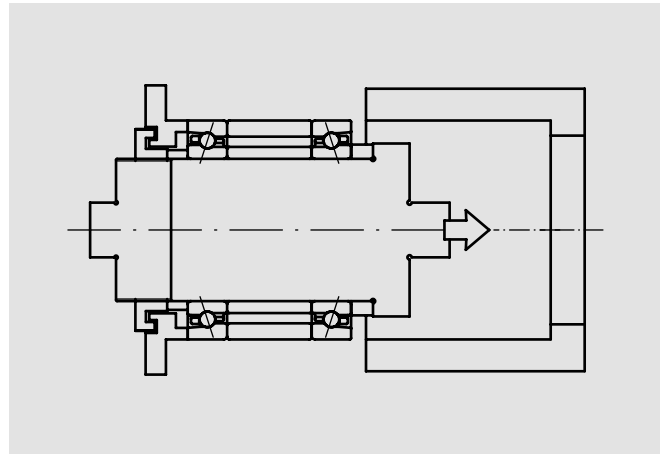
Direction of Load for Angular Contact Ball Bearings
